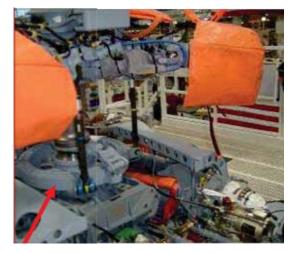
Magnesium gearbox of a rotor helicopter [52]
